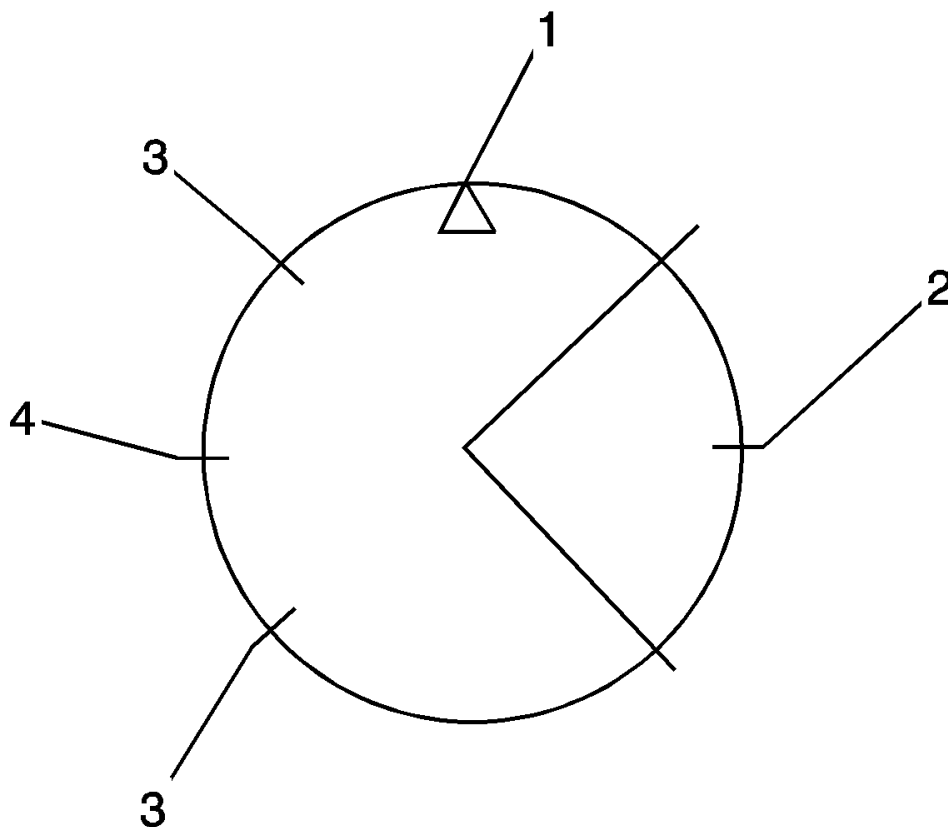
View Of Piston Oil Rings, Rail Gaps, And 2nd Compression Ring
